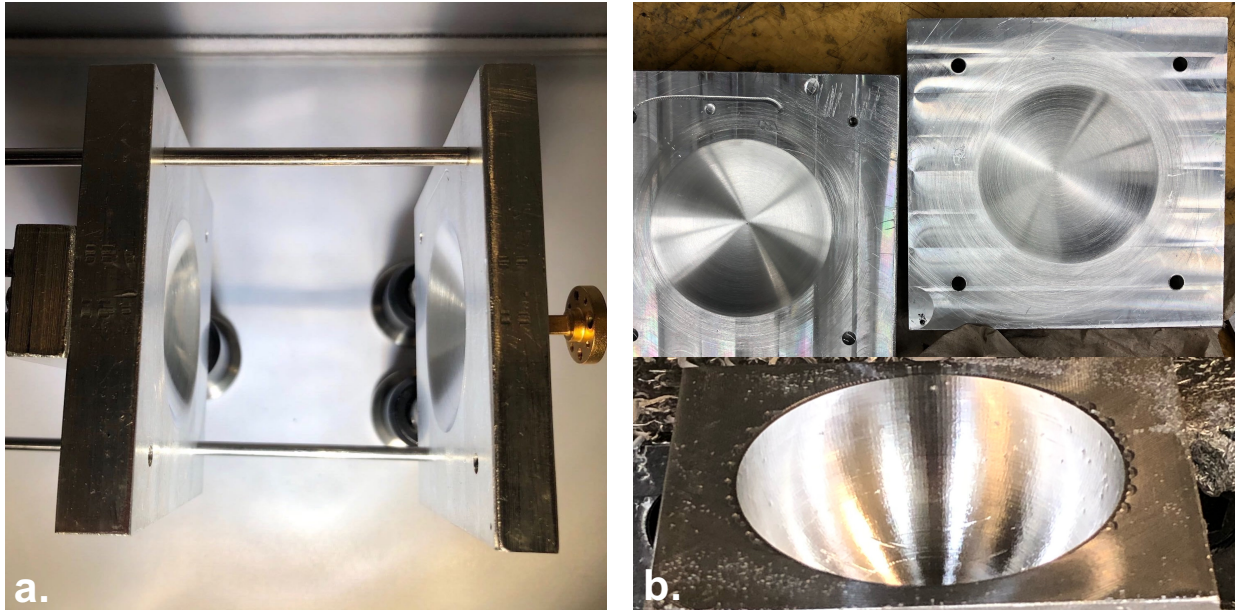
Photos of a machined mm-wave Fabry-Perot cavity: a. The assembled aluminum cavity for room temperature measurement, b. The machined Al mirrors
